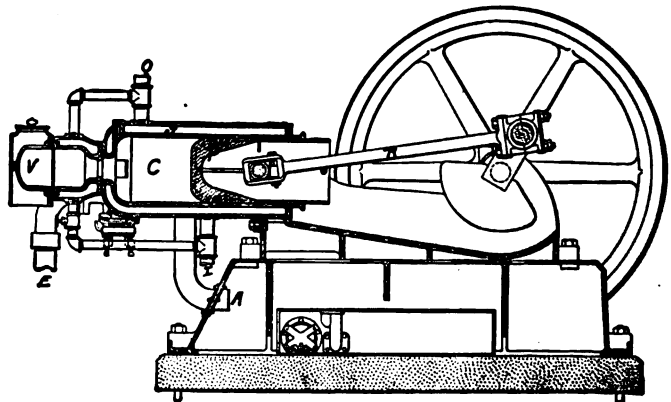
The "Hornsby-Akroyd" oil engine, showing simplicity of construction. A, air pipe; C, cylinder; E, exhaust pipe; J, water jacket; R, connecting rod; I, water inlet; O, water outlet; P, piston; V, vaporizer.
